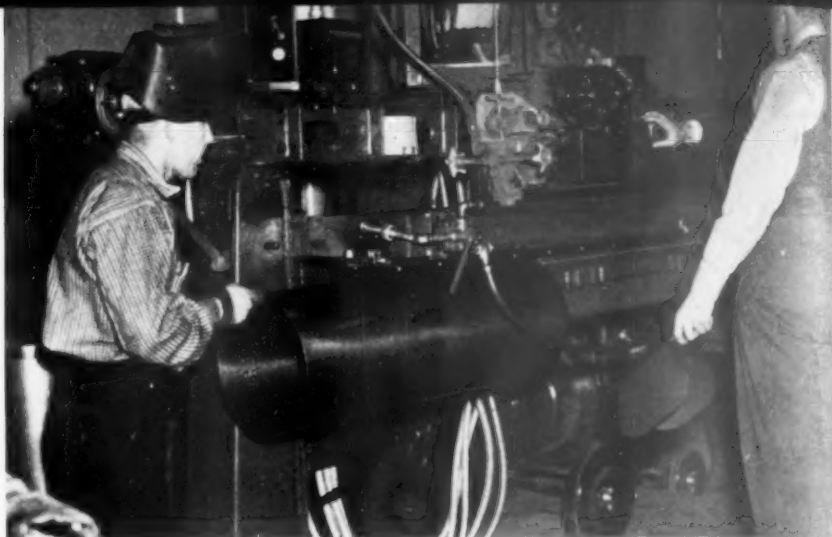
Automatic welding head in combination with a horn type welding fixture for application on longitudinal welds, as for cylinders and hollow rolls.
